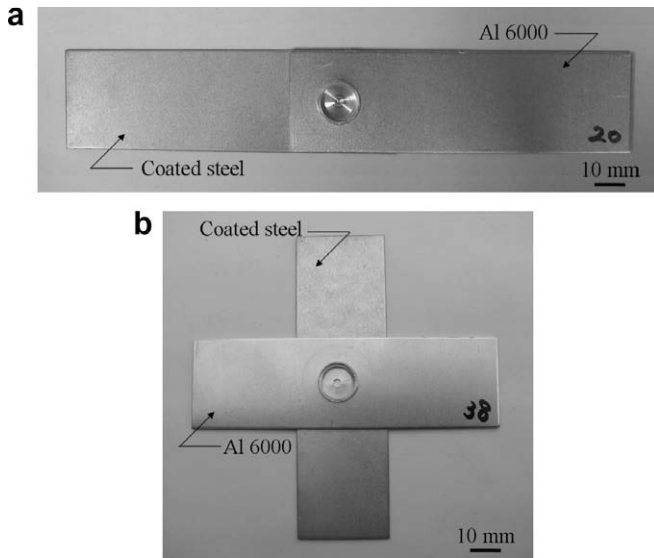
(a) A lap-shear specimen with an Al/Fe spot friction weld, (b) a cross-tension specimen with an Al/Fe spot friction weld.
